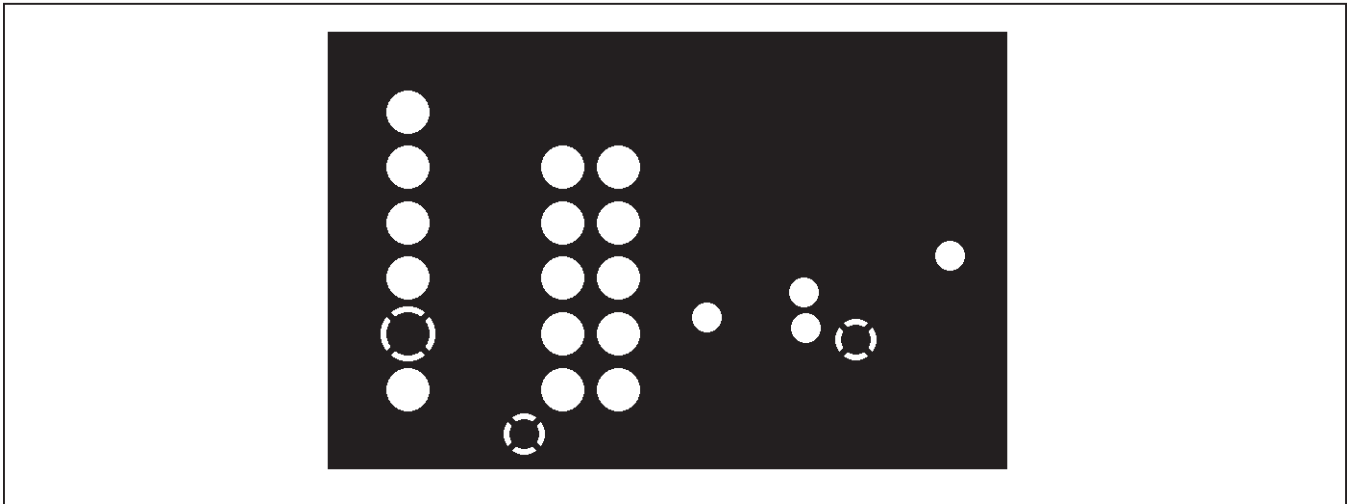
MAX31723PMB1 Peripheral Module PCB Layout—Inner Layer 1 (Ground)
